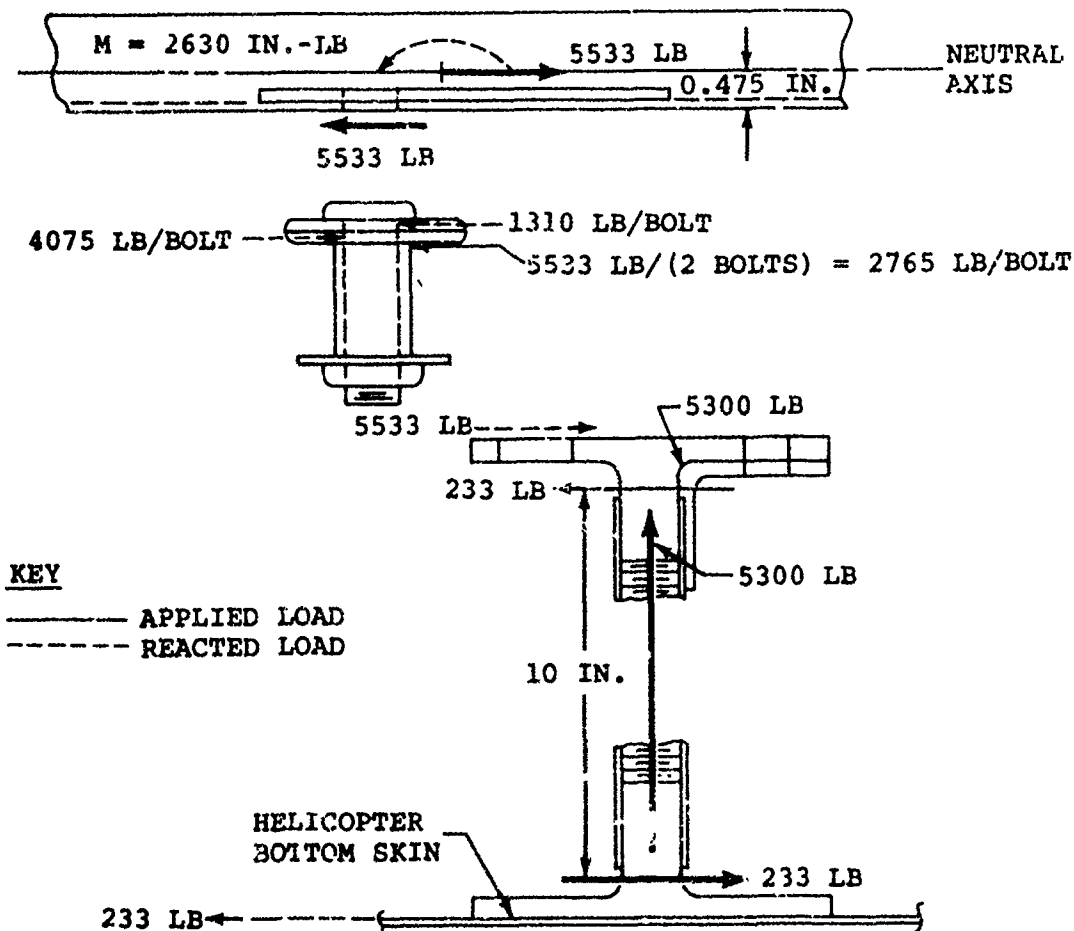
Supporting Structure Loads, Isolated Floor Rail Seated on Floor Frame, Free Body Diagrams of Structure and Loads.
